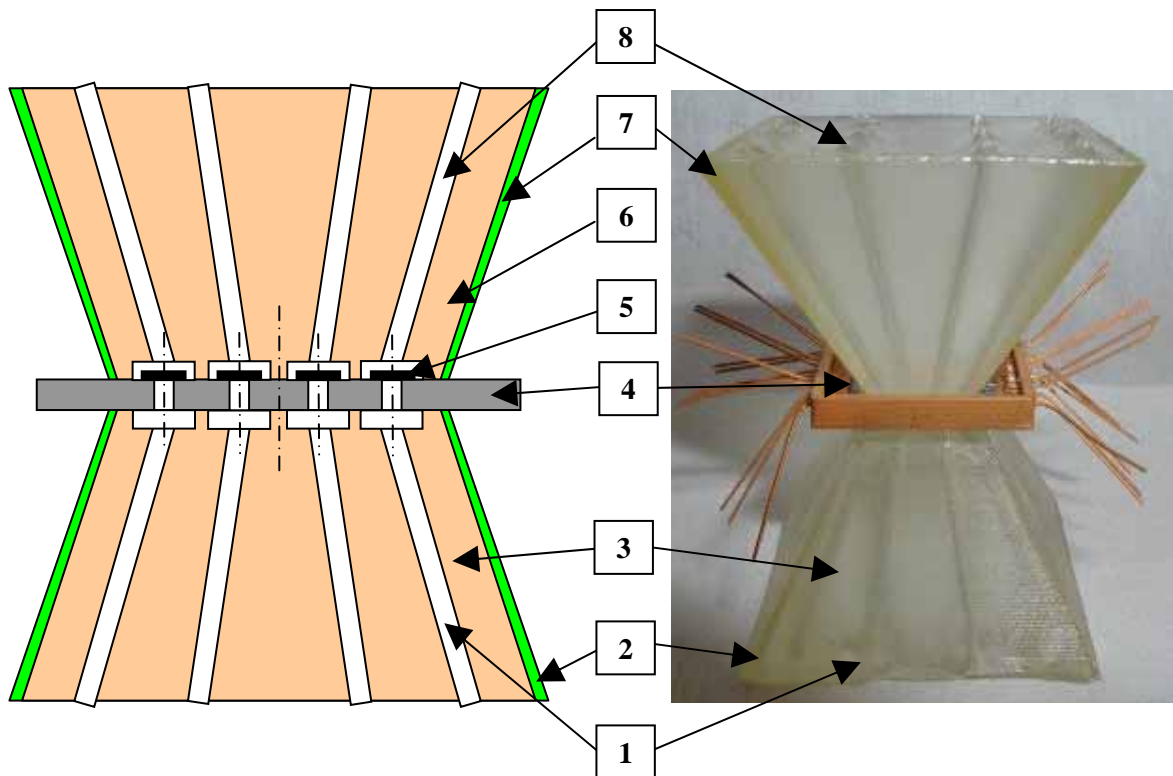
The assembled fluidic package for the microvalves. Where: 1 = Inlet fluidic channels; 2 = Inlet fluidic housing made by SLA; 3 = PDMS filled; 4 = Silicon substrate; 5 = microvalves; 6 = PDMS filled; 7 = Outlet fluidic housing; 8 = Outlet fluidic channels
